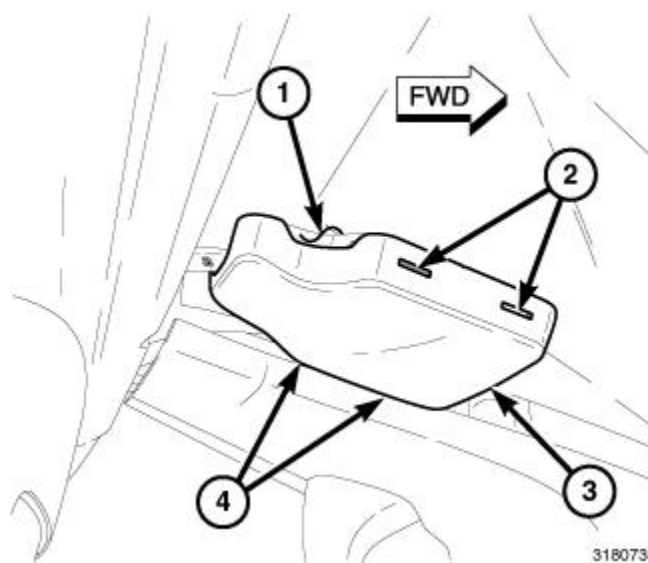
Humidity Sensor Cover, Sensor Bracket & Retaining Tabs
